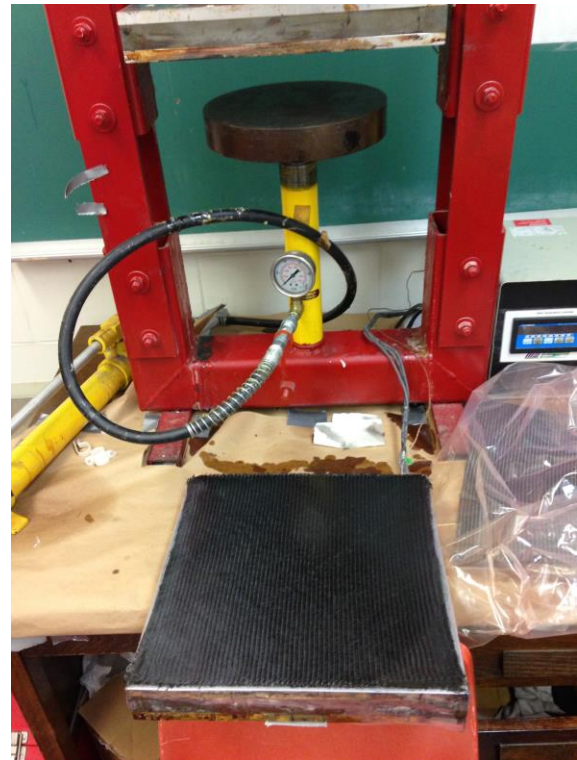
Platen Press used to manufacture the test specimen, and cured composite plate (bottom)
